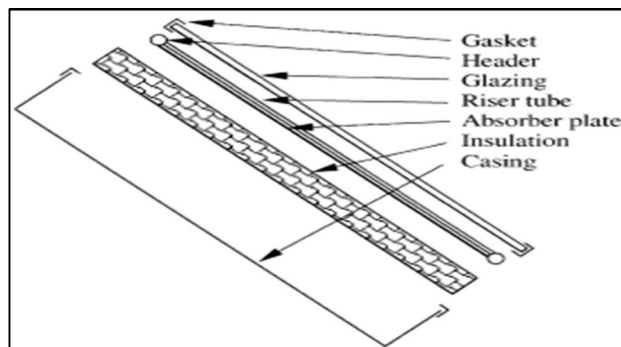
Exploded View of Flat Plate Collector [6]
